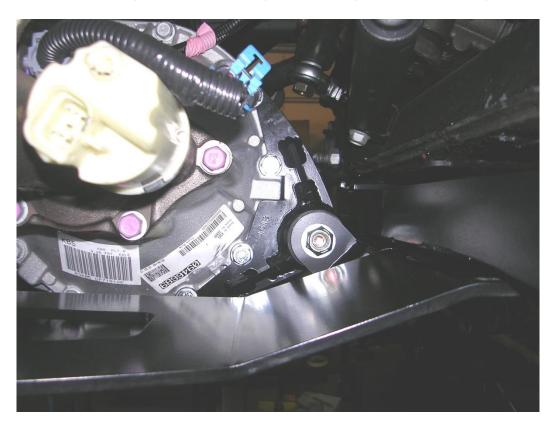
Cognito driver side differential mount bolted to Cognito skid plate.
